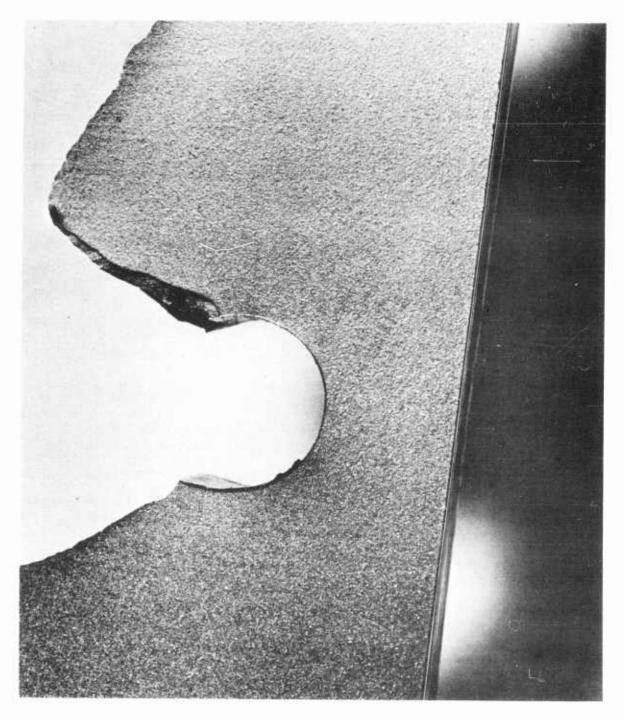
Rear Spar Fracture Area -- Burrs on Edge of Hole
